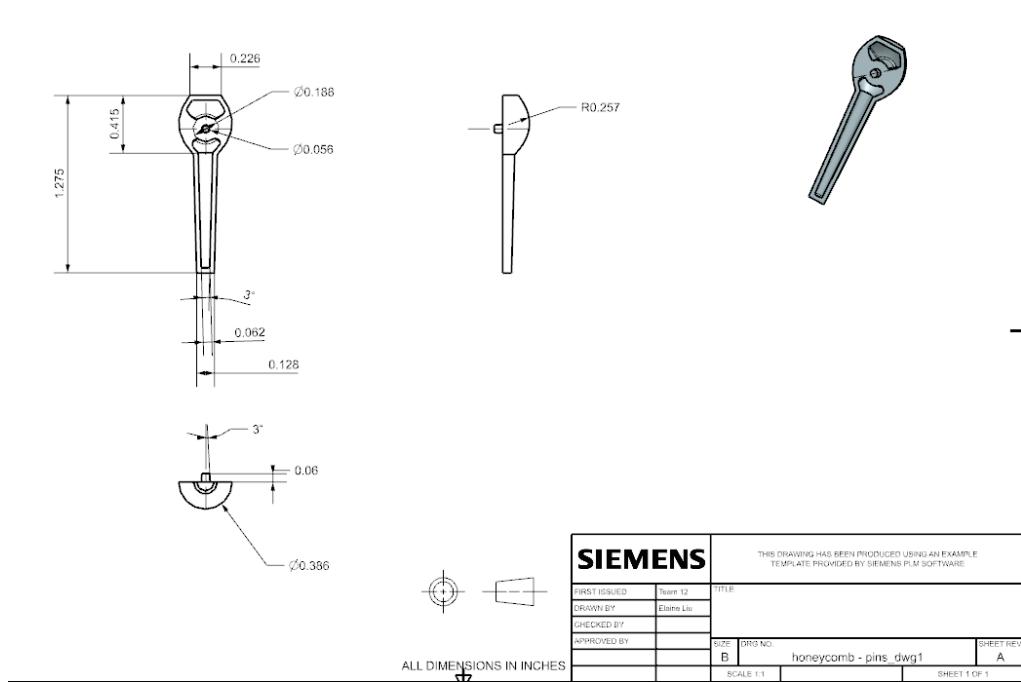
Dimensioned CAD Drawing of Lollipop with Pins
